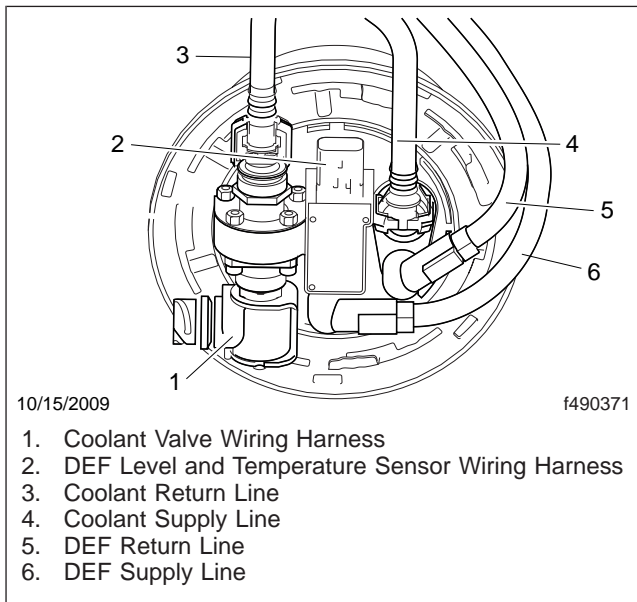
, DEF Tank Header Unit (Detroit Diesel shown)
